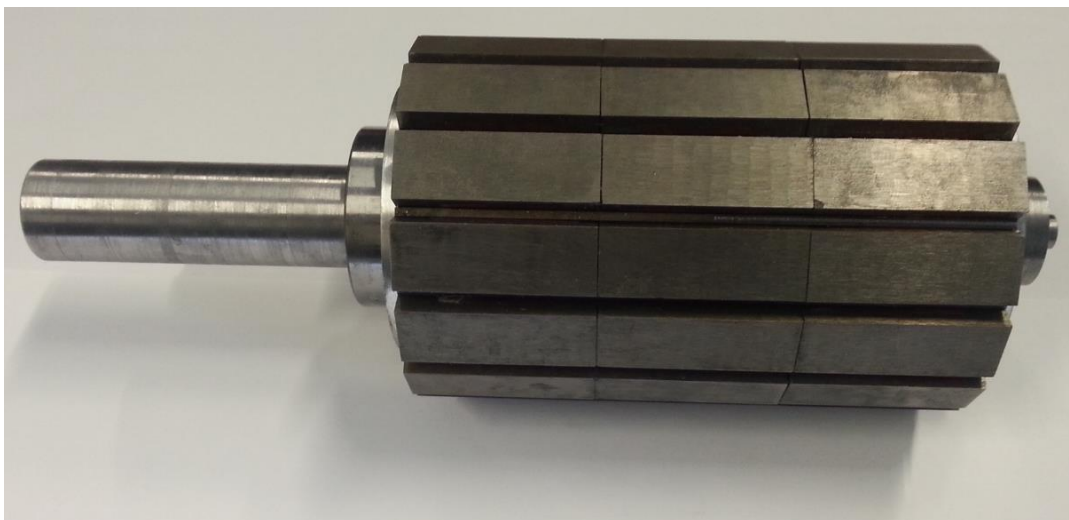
Prototyped rotor with permanent magnets assembled.
